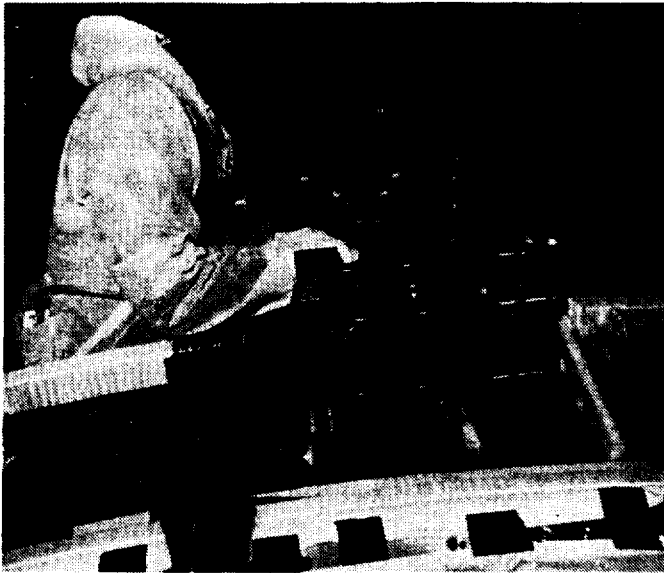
Setting up the Brazing Jig and the Induction Brazing Coil
